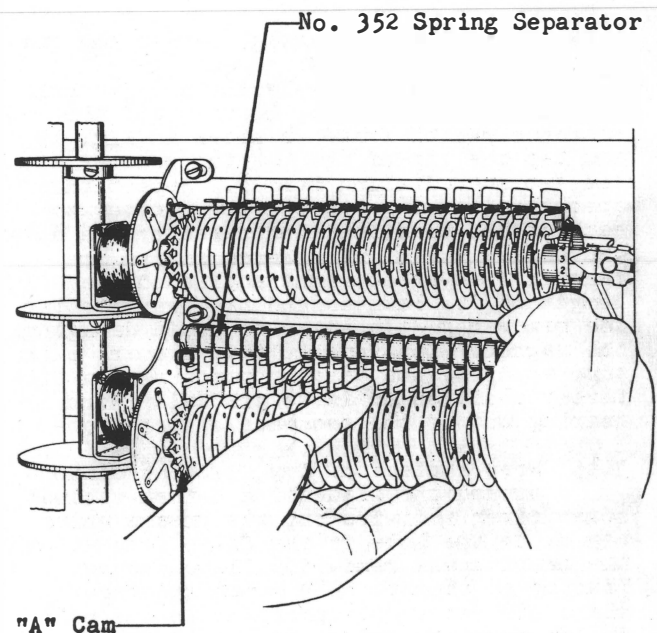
Method of Replacing a Sequence Switch Camshaft Assembly
